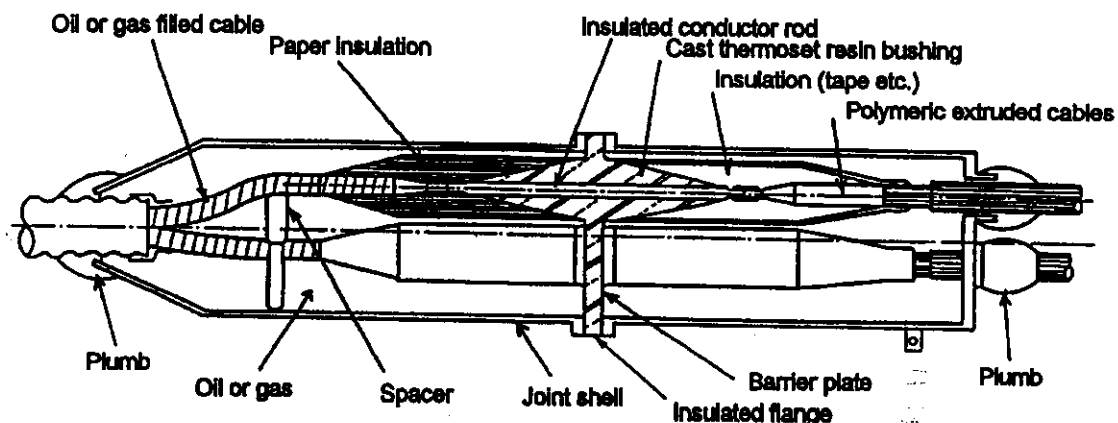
'Polymeric extruded cable to oil or gas filled paper cable' transition joint, three core type
